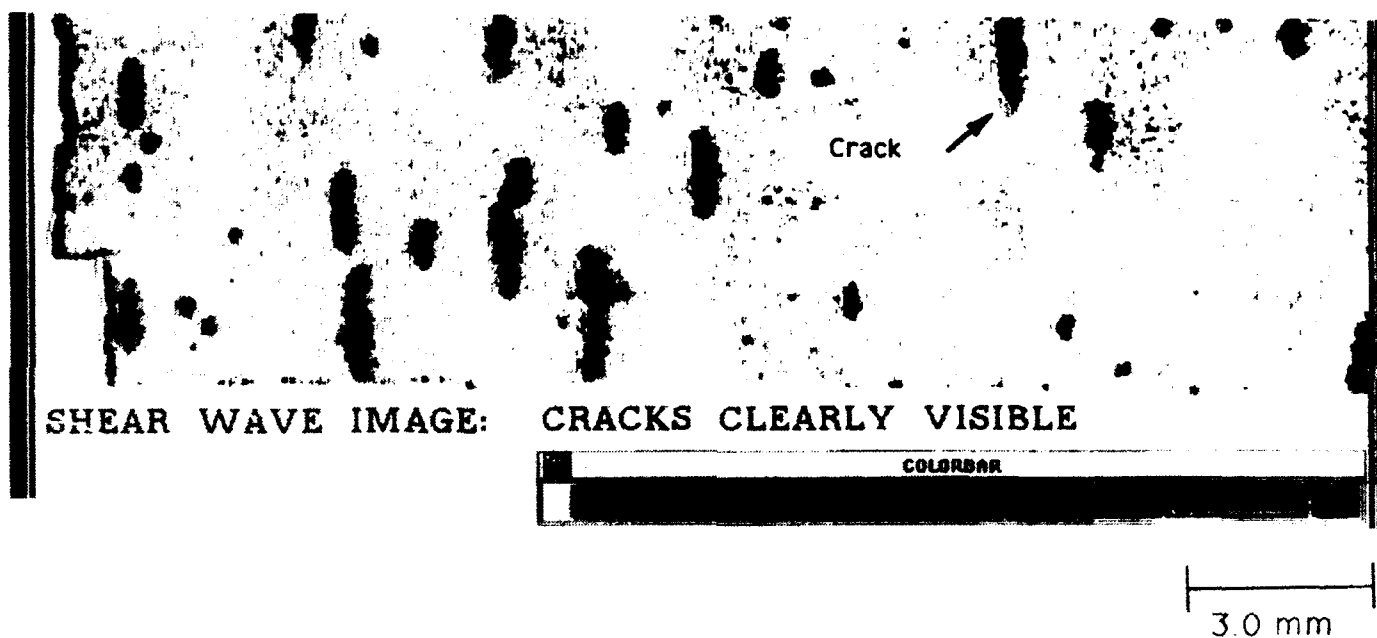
Acoustic microscope image of SiC/Ti MMC specimen showing matrix cracks to demonstrate capability of technique developed under this program. The black vertical indications represent cracks, and are best detected using a shear mode.
